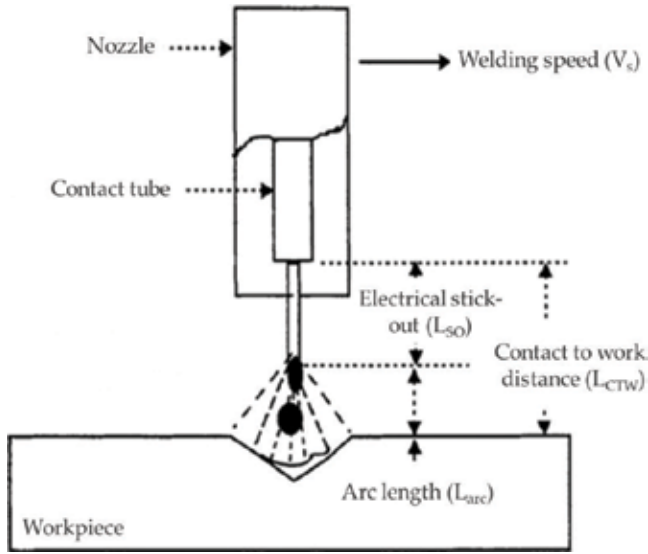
Schematic of the welding torch configuration (adapted from [1]).
